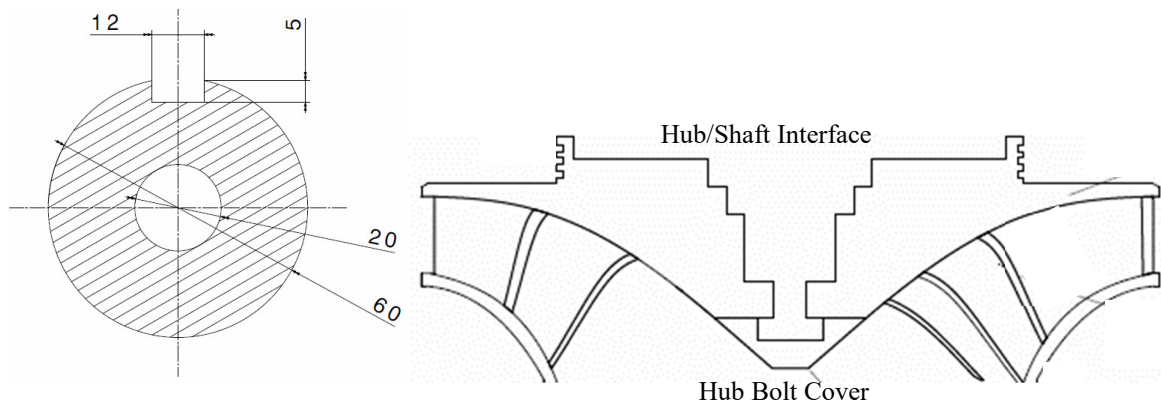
a) TTL Existing Shaft Key Slot, b) TTL Existing Hub/Shaft Interface (5)
